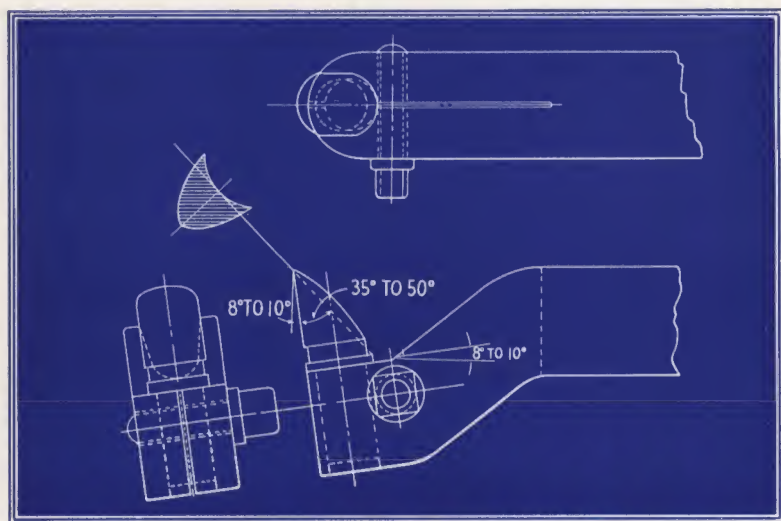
Lathe tool with bit that is easily ground to the proper shape.
